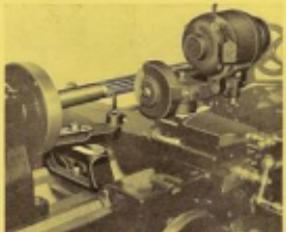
Sharpening a Straight Reamer using a Grinding Attachment on the Lathe.
